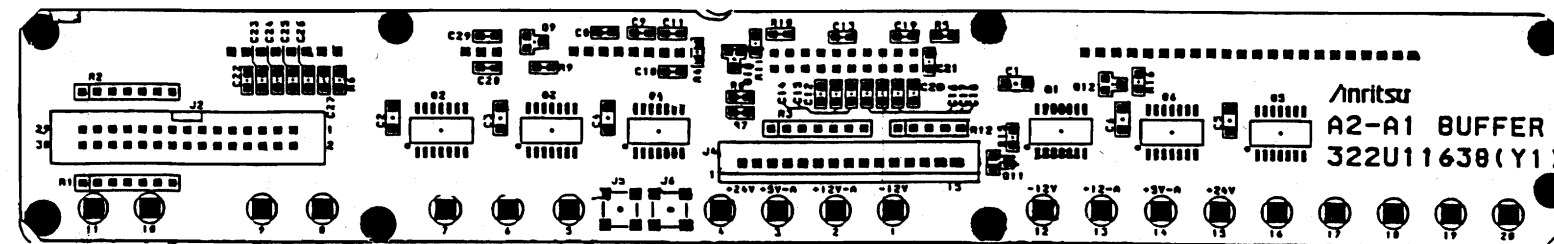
A2-A1 BUFFER PC-Board Parts Layout
